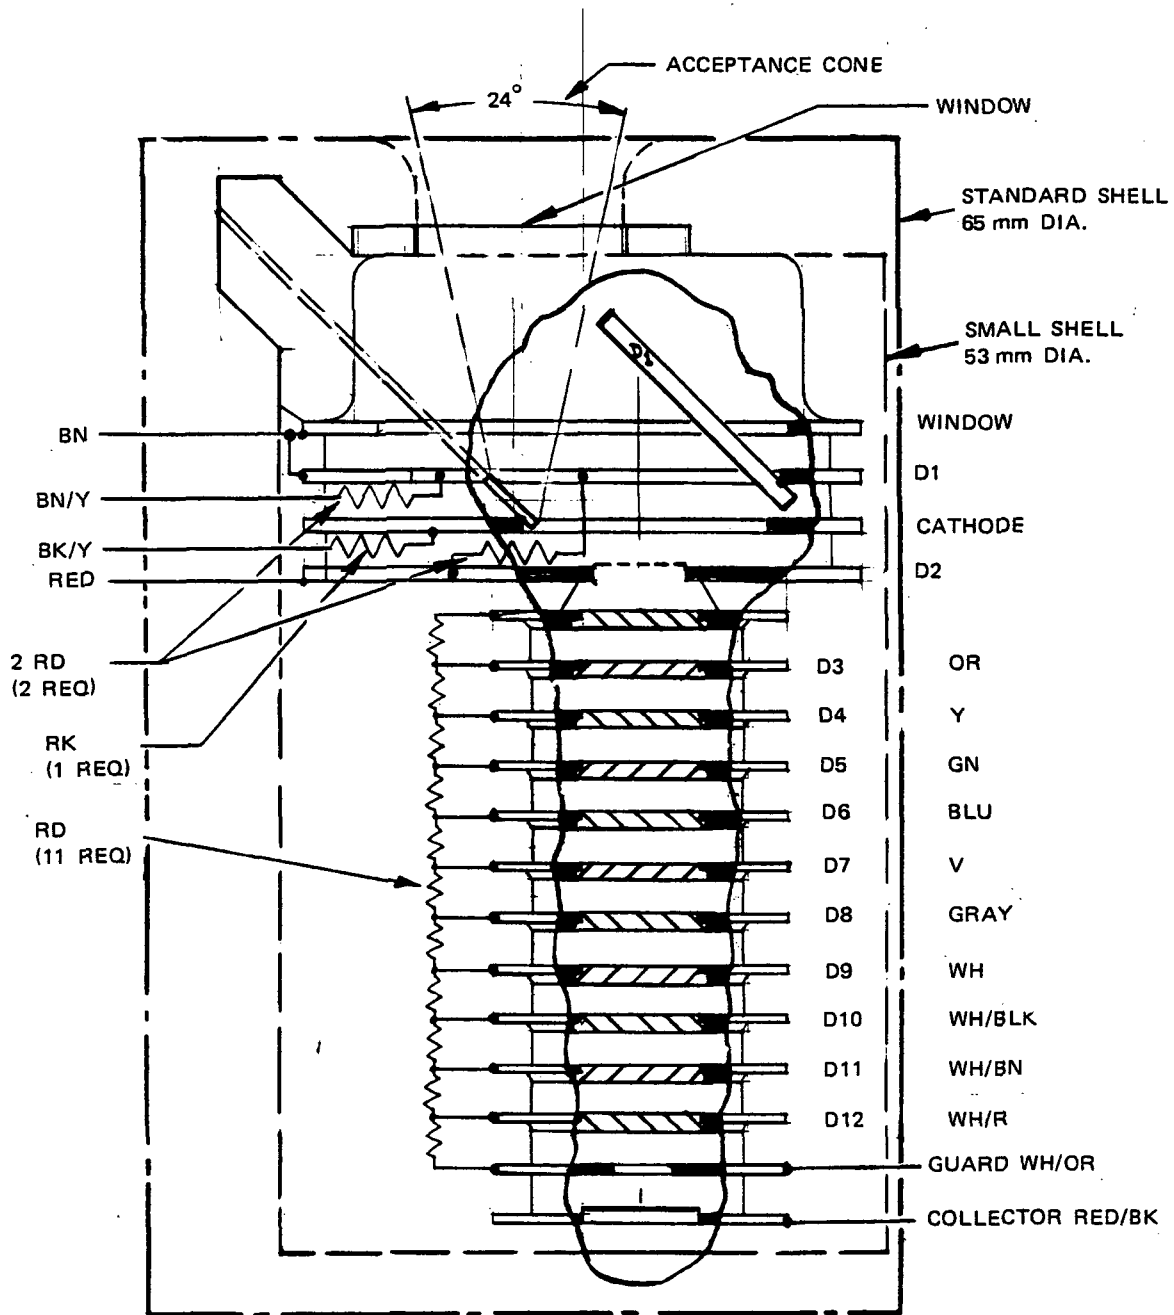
CUTAWAY VIEW OF VPM-164 GEOMETRY
